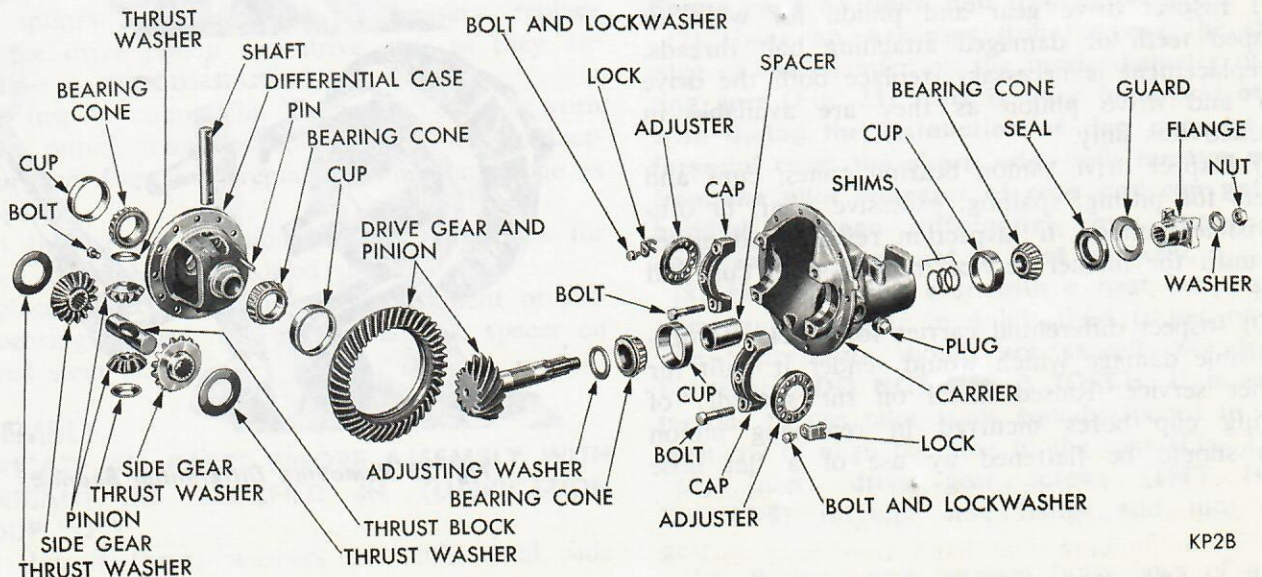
Differential Carrier Assembly (Small Stem Step Pinion)
